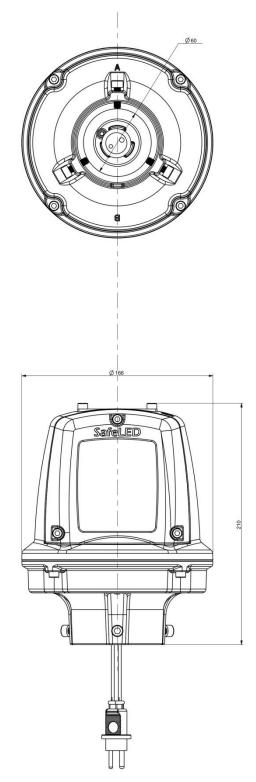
LIGHT FIXTURE DIMENSIONS
